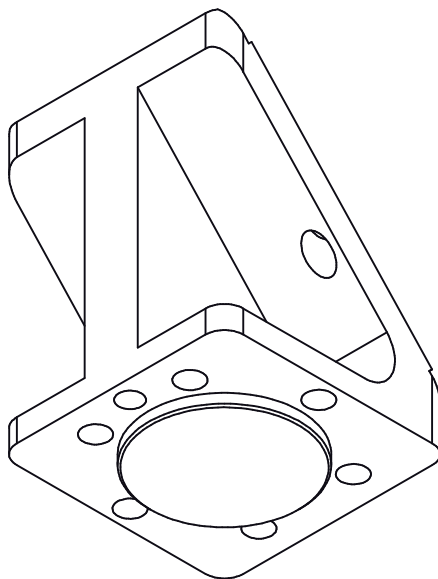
View of 47° dovetail mounting adapter from below (sensor side)
